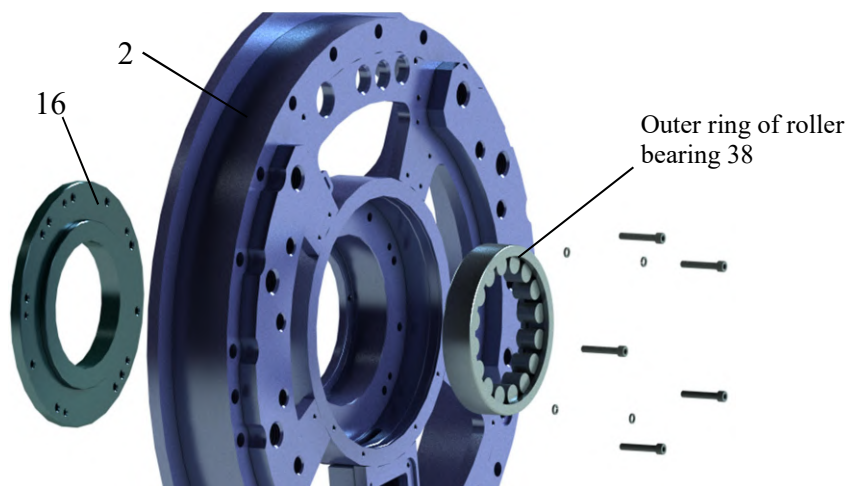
Dismantling of Parts from the Bearing Shield (Brake Side)
